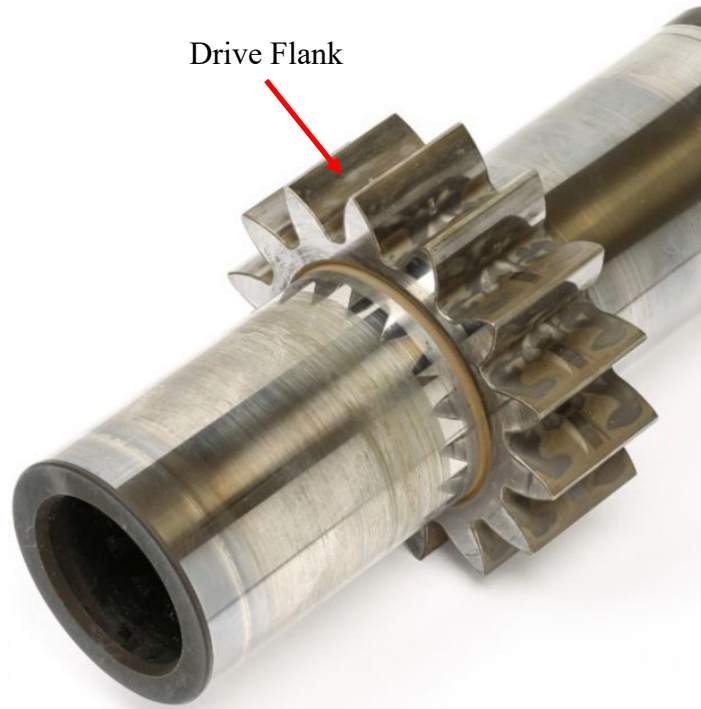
Detail of HP Fuel Pump Drive Gear Tooth
